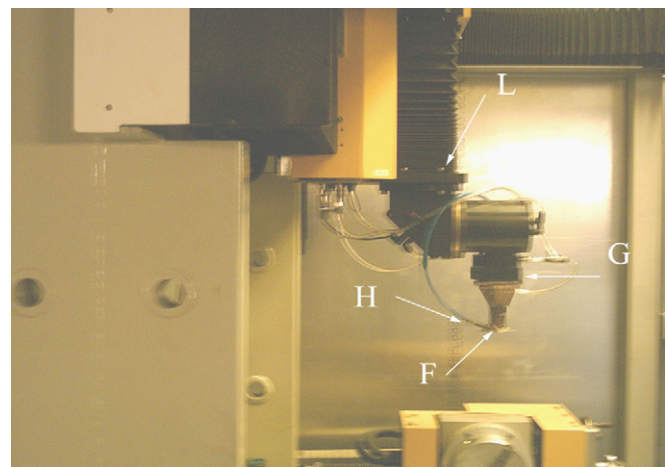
Photographs showing the assembly of shrouding system with head of laser: F, shrouding device; H, side nozzle; G, laser head; and L, laser mirror.
